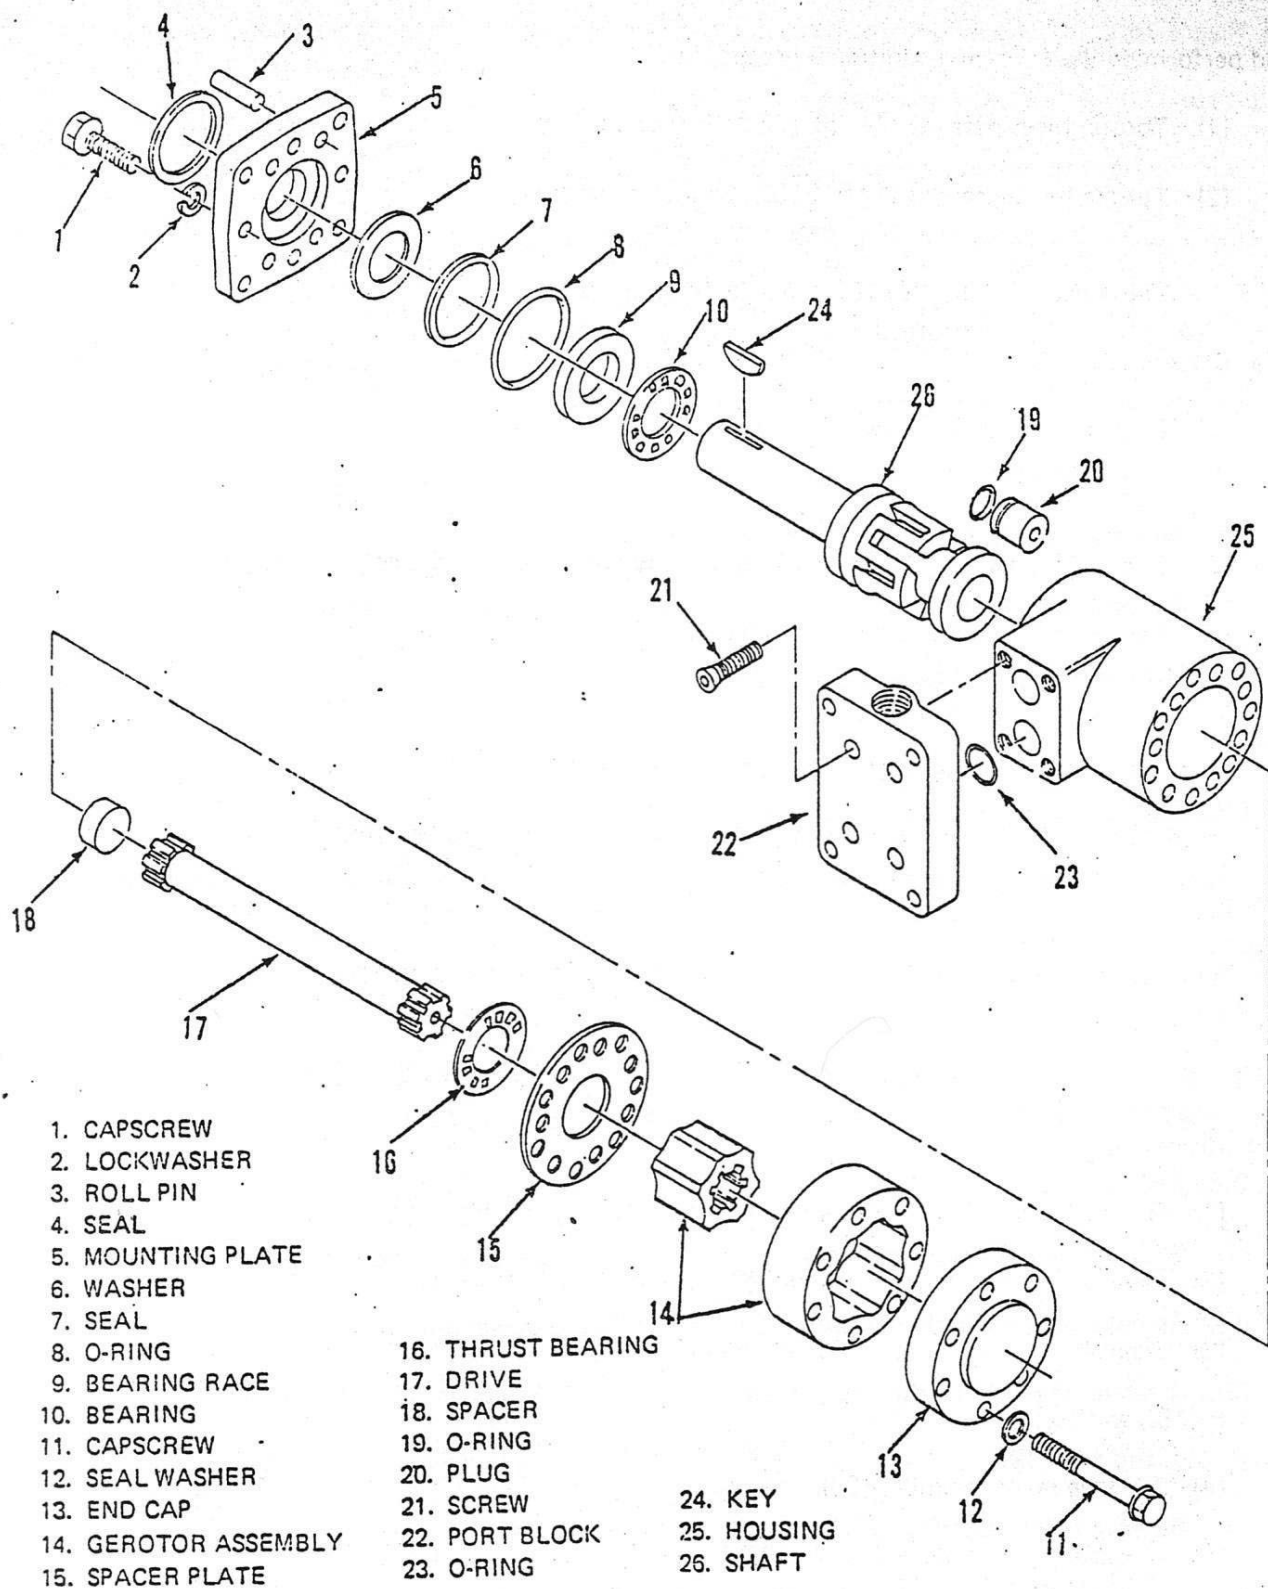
Water Injection Drive Motor (CHARLYNN)
